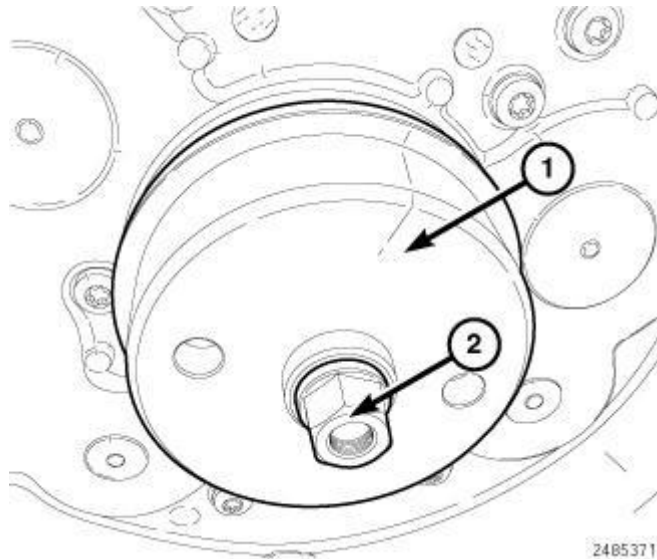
Rear Crankshaft Oil Seal & Rear Main Seal Ring Installer Adaptor
